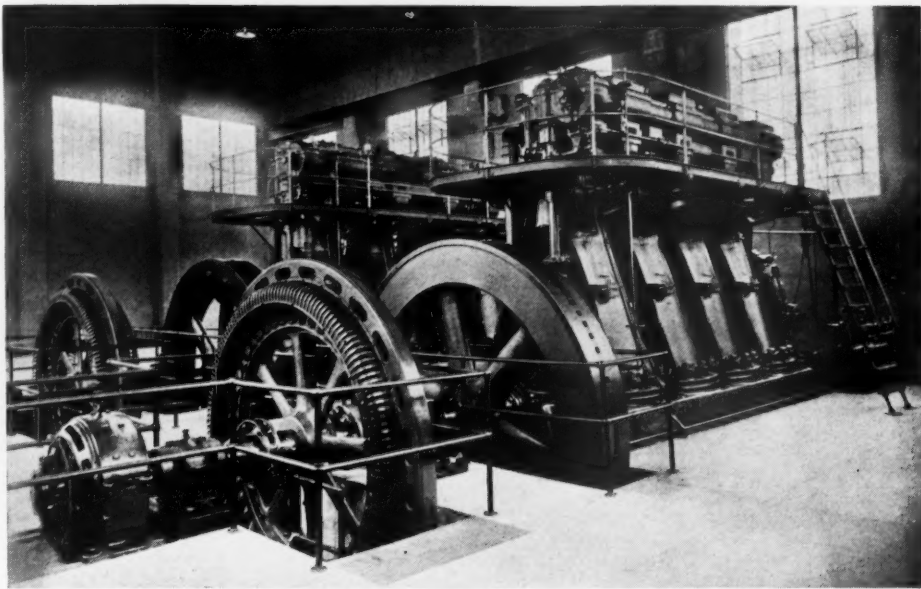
Fifteen-year-old engine in which crankshaft and A-frame were repaired by an expert welding job as shown in Fig. 12
